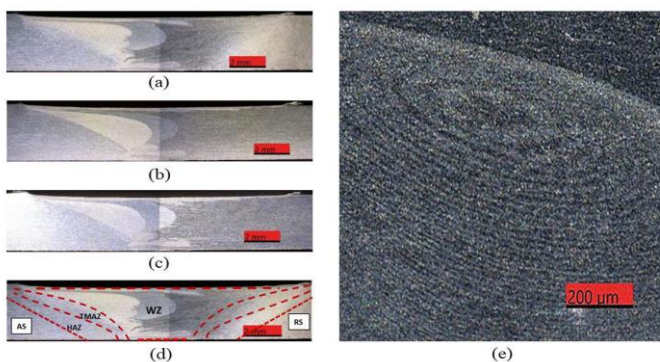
Macrograph of (a) As welded (b) PWHT 5M8H (c) PWHT 60M8H (d) As welded FSW zone (e) Onion ring
